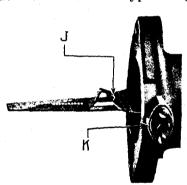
Testing Spring of Carburetor Automatic Throttle
